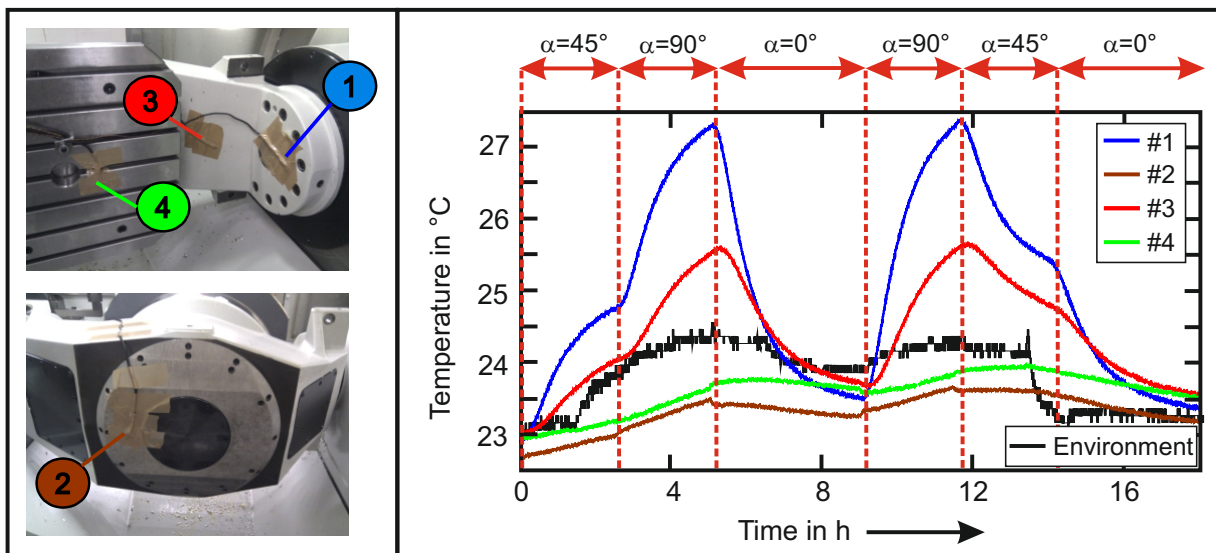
Machine tool A/C - Measurement of surface-temperatures of a swivelling axis with thermo-elements during different conditions: standstill at a tilting angle of 45° / 90° / 0° / -90° / -45° / 0°. Nr. 1 – 4 mark the four sensor positions according to the measurement in the right diagram (corresponding colours).
